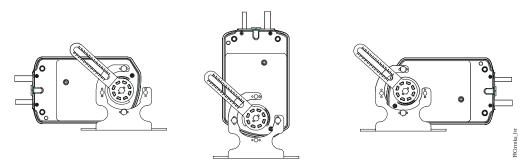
M9208-100 Remote Mounting Kit with Actuator, Horizontal Left, Vertical, and Horizontal Right
